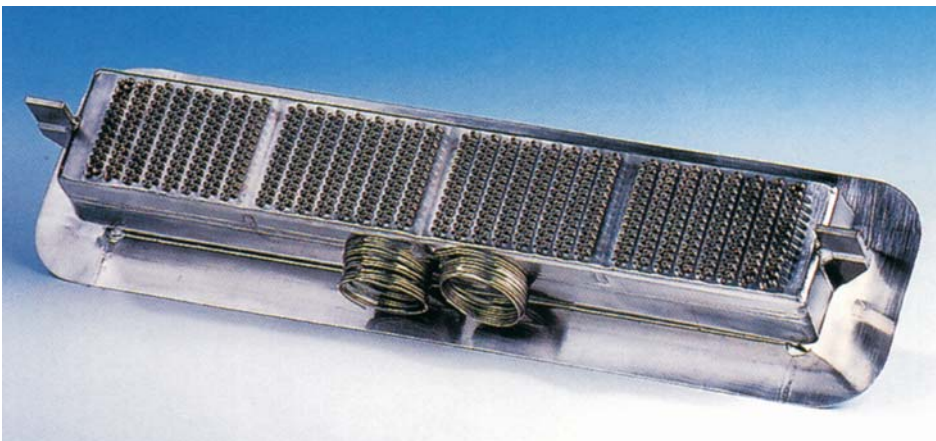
Welded nozzles in a glass-drawing pan made of platinum (Saxonia Edelmetalle GmbH); Processing with a CO₂ laser, industrial robot, and a beam deflecting optic with integrated optical measurement sampler for position detection
